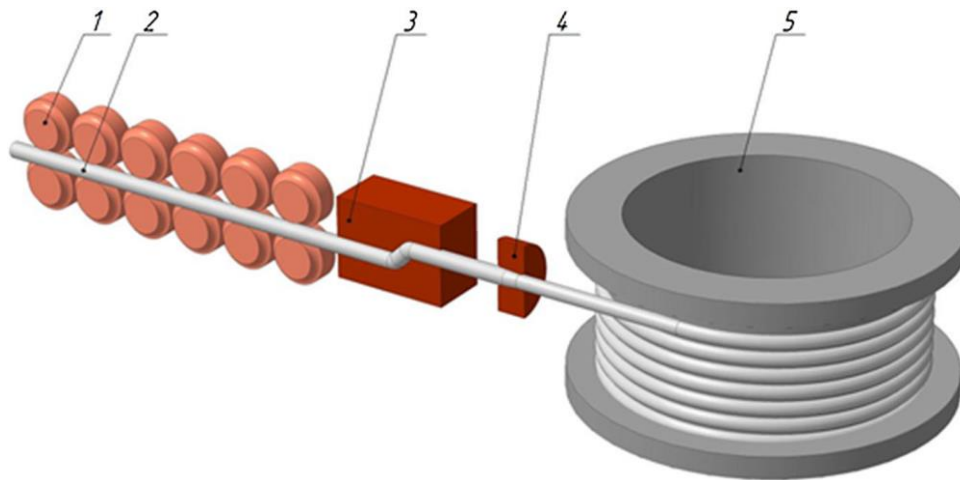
Scheme of "ECAP-drawing": 1 - wire; 2 - pushing device; 3 - ECA-matrix; 4 – drawing die; 5 - drum
